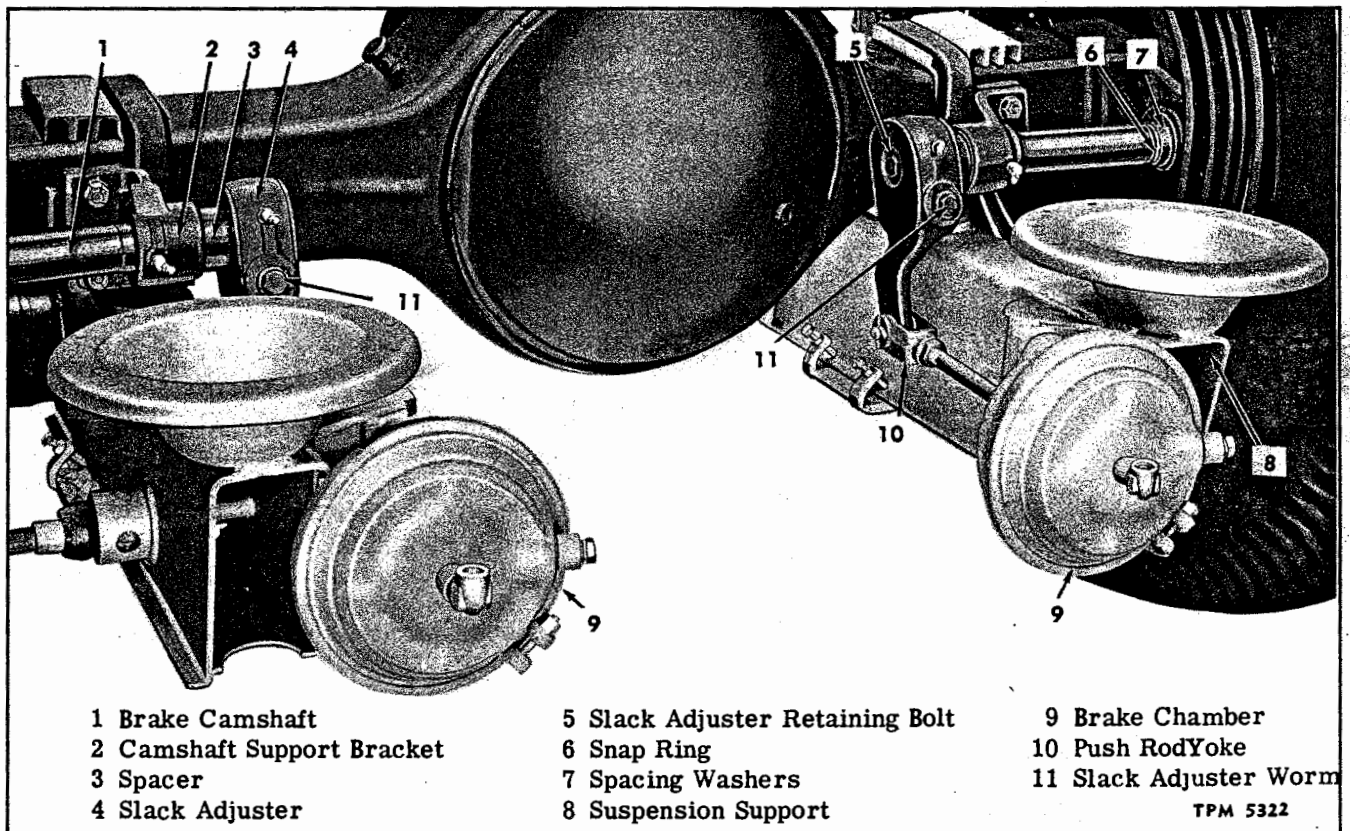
Rear Brake Camshaft, Slack Adjuster, and Camshafts Assembled to Axle
